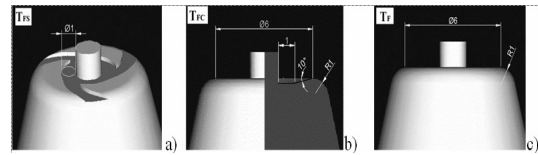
Tools used and their main dimensions in mm: (a) fillet + scroll tool ( $T_{FS}$ ); (b) fillet + cavity tool ( $T_{FC}$ ); (c) fillet tool ( $T_F$ ).
